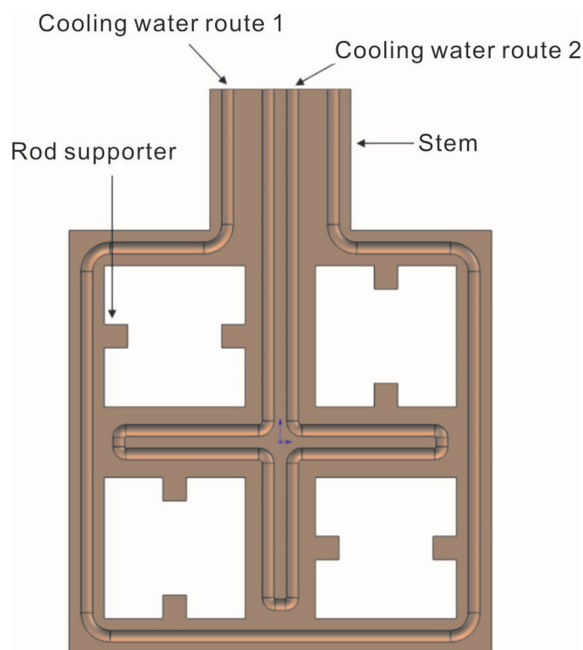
Image of the front view of the frame and the view of the two sets of water routes. One route is along the frame edge. The other route is to cool the cross part.
